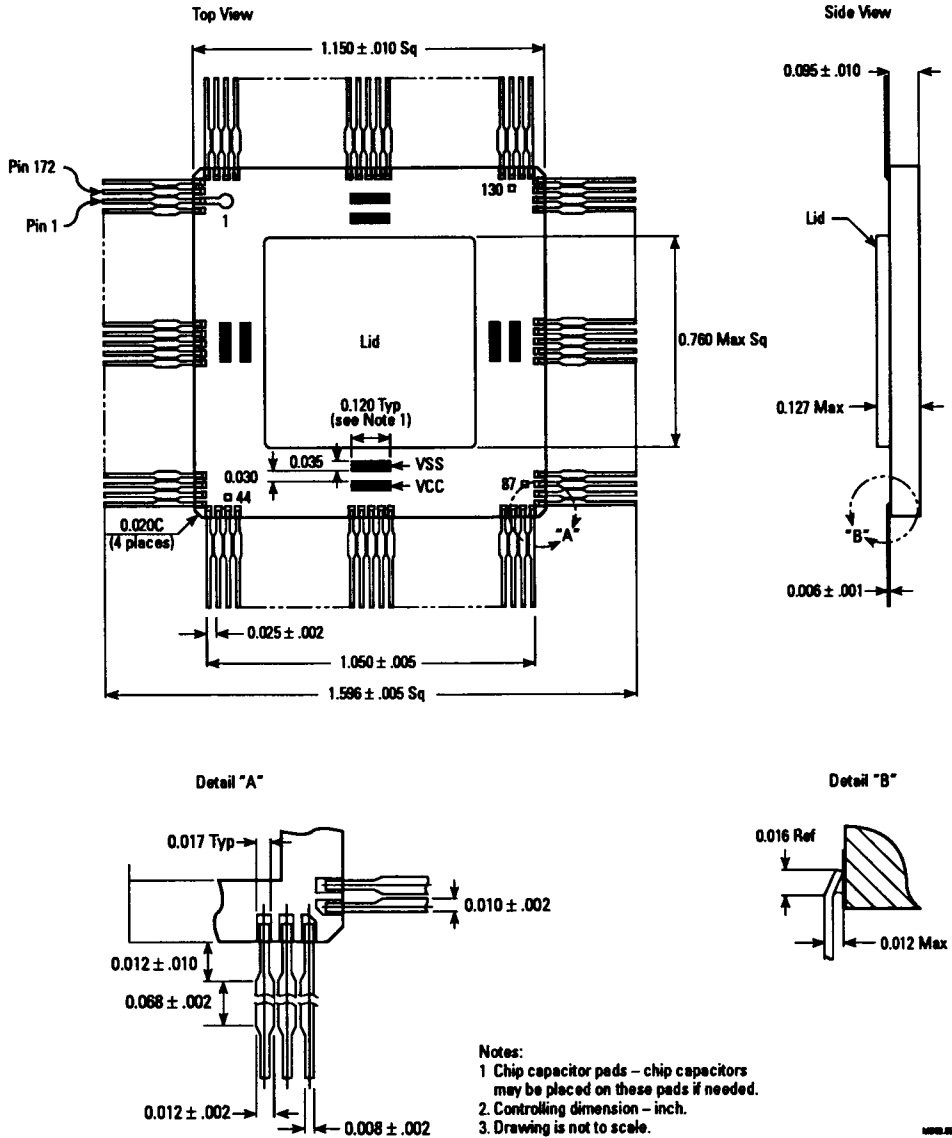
LR3000 Mechanical Drawing: 172-Pin Cavity-Up CLDCC
